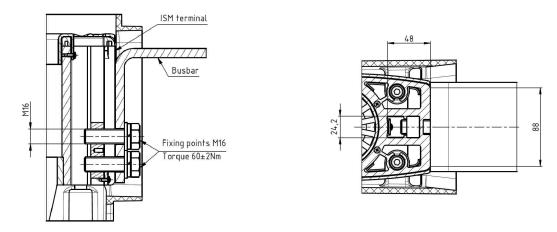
Details of ISM15_HD_1 terminals connection to rectangular cross-shaped busbars (at fixed installation, for example)
